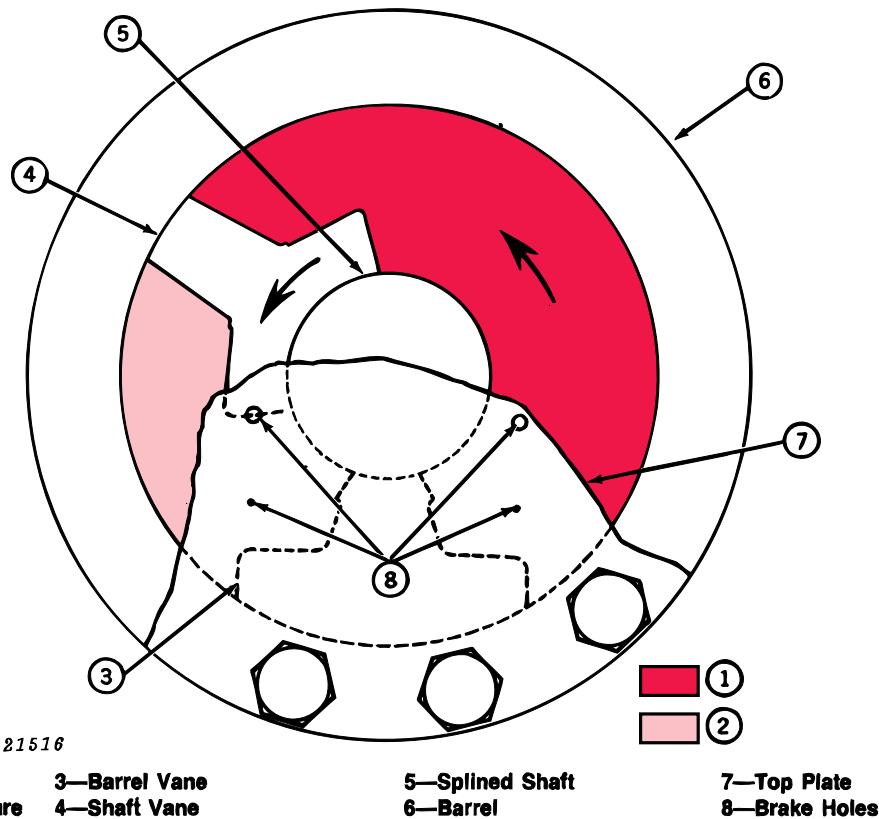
Swing Cylinder Hydraulic Brake Operation
